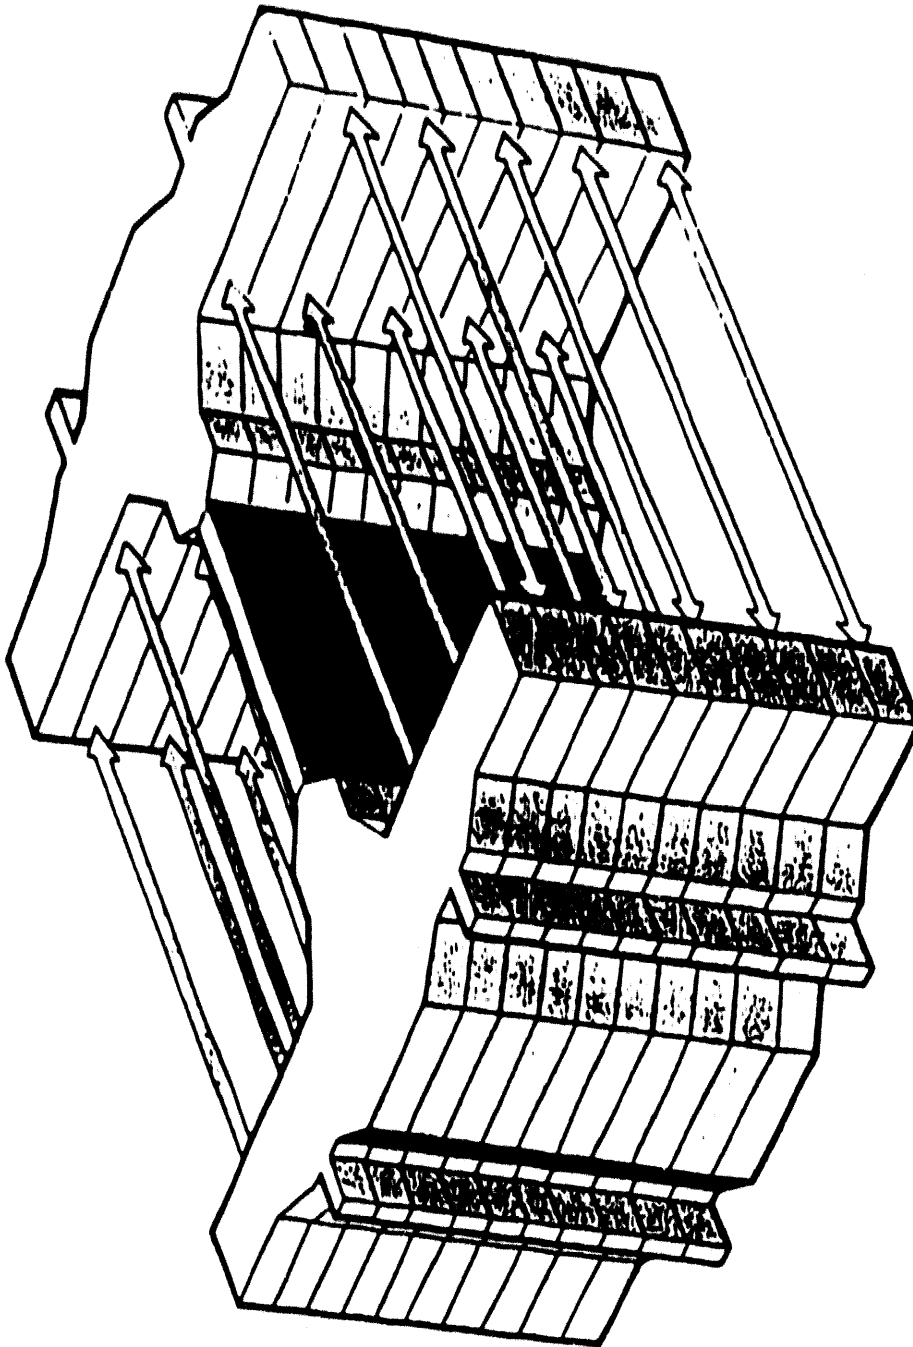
TEST ASSEMBLY ARRANGEMENT FOR UNIAXIAL SPECIMENS CCSR 1.00
